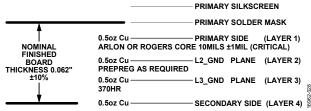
Cross Sectional View of the EV1HMC891ALP5 PCB Layers
